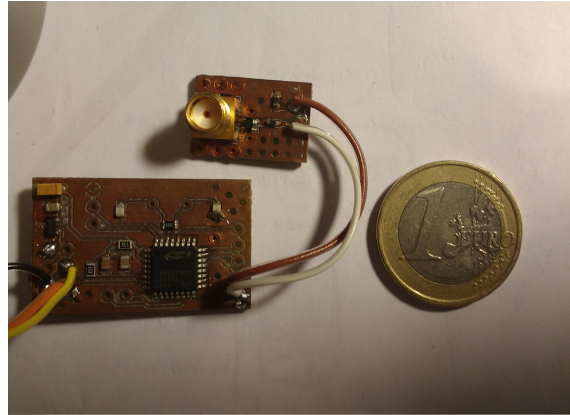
The Control Circuit PCB connected to the RF front end PCB.
